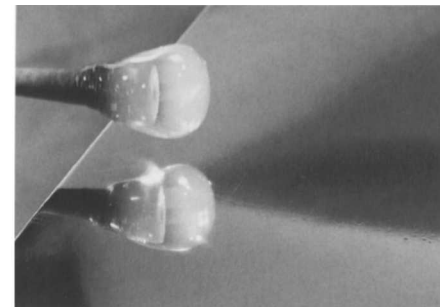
The glass receives its initial shaping on a cool metal surface called a marver.
